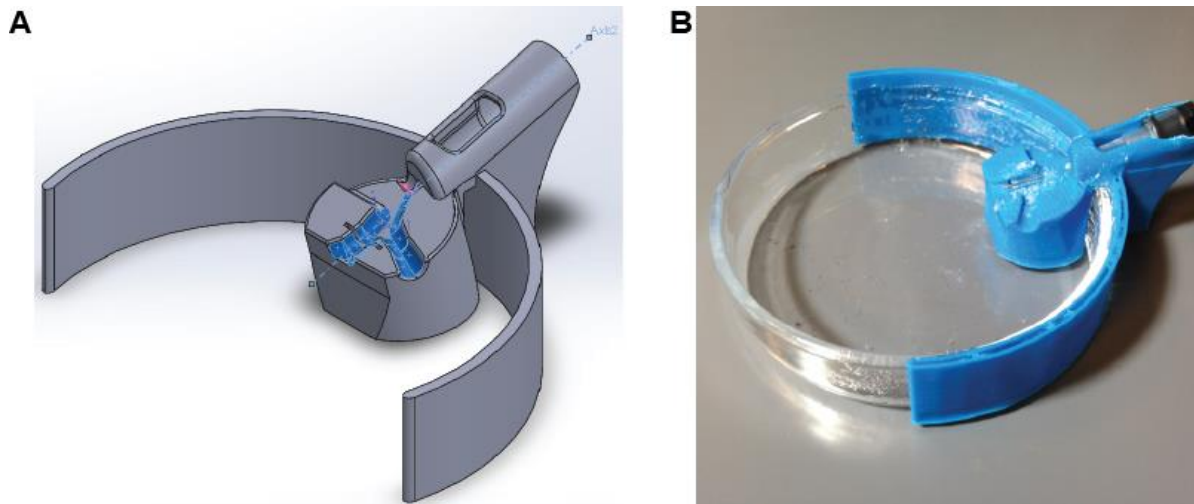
A 3D printed perfusion fixture for a FRESH-printed right coronary arterial tree. (A) A 3D CAD model of the perfusion fixture with the arterial saddle (recessed grooves) shown in blue. (B) An example of the perfusion fixture 3D printed using PLA and positioned on a Petri dish. The syringe tip used for perfusion into the trunk of the arterial tree is visible on the right
